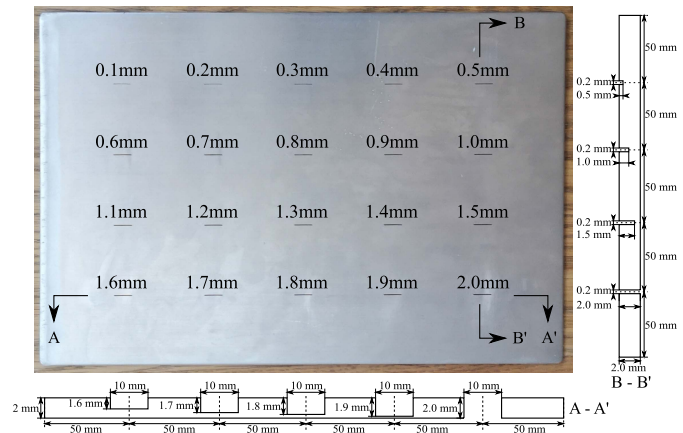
Illustration of the geometry dimensions of a stainless steel sheet that is used as a specimen to collect data from.
